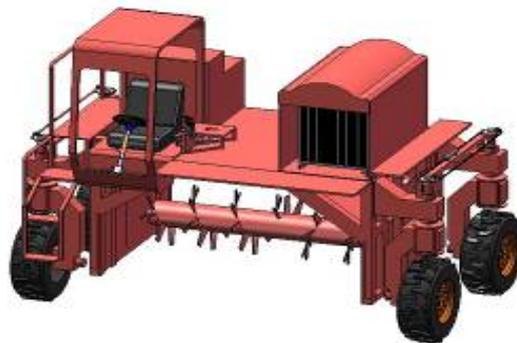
3-D CAD of the developed self-propelled turning machine.
